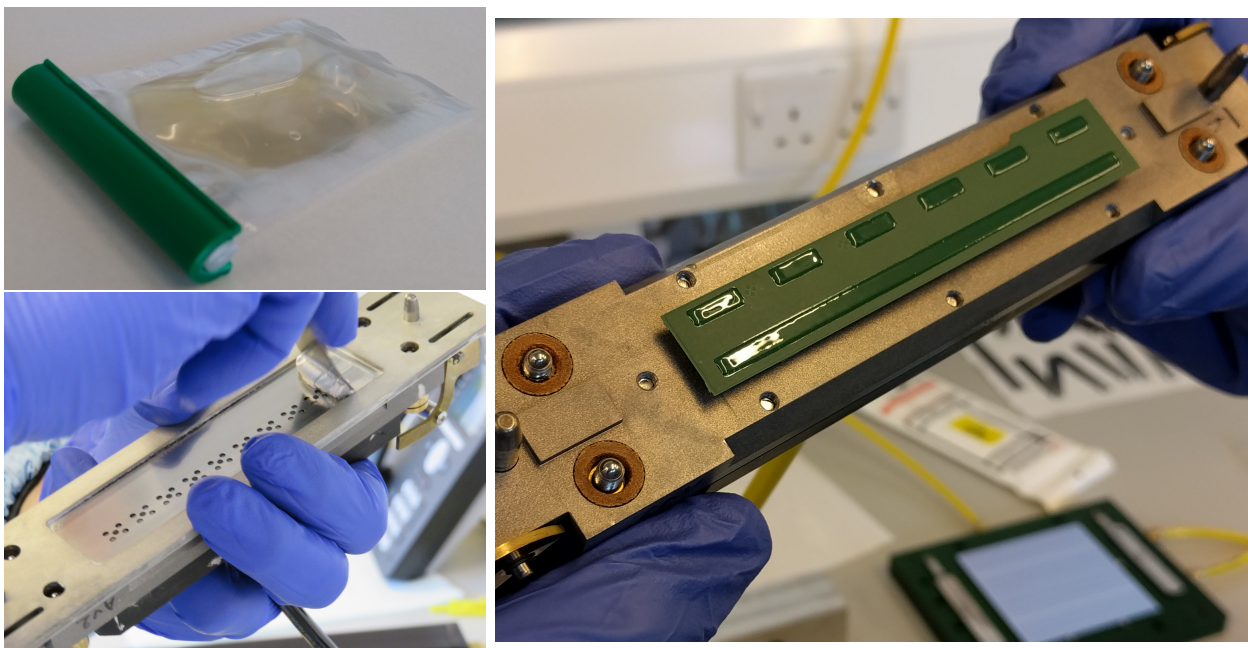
Photographs of the module epoxy glue in its packaging (top-left) and the technique by which it would be smeared across the stencil (bottom-left), with that caveat that this example photograph represents a hybrid-chip stencil smearing an older silver epoxy glue instead, followed by the glued hybrid once the stencil has been removed (right) held by the pick-up tool.
